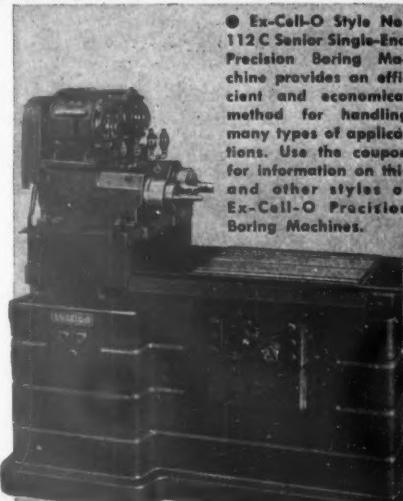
Illustration A shows an Ex-Cell-O Precision Boring Machine (Style No. 112C) used for turning the radius and chamfering ends of bearing. In illustration B is
